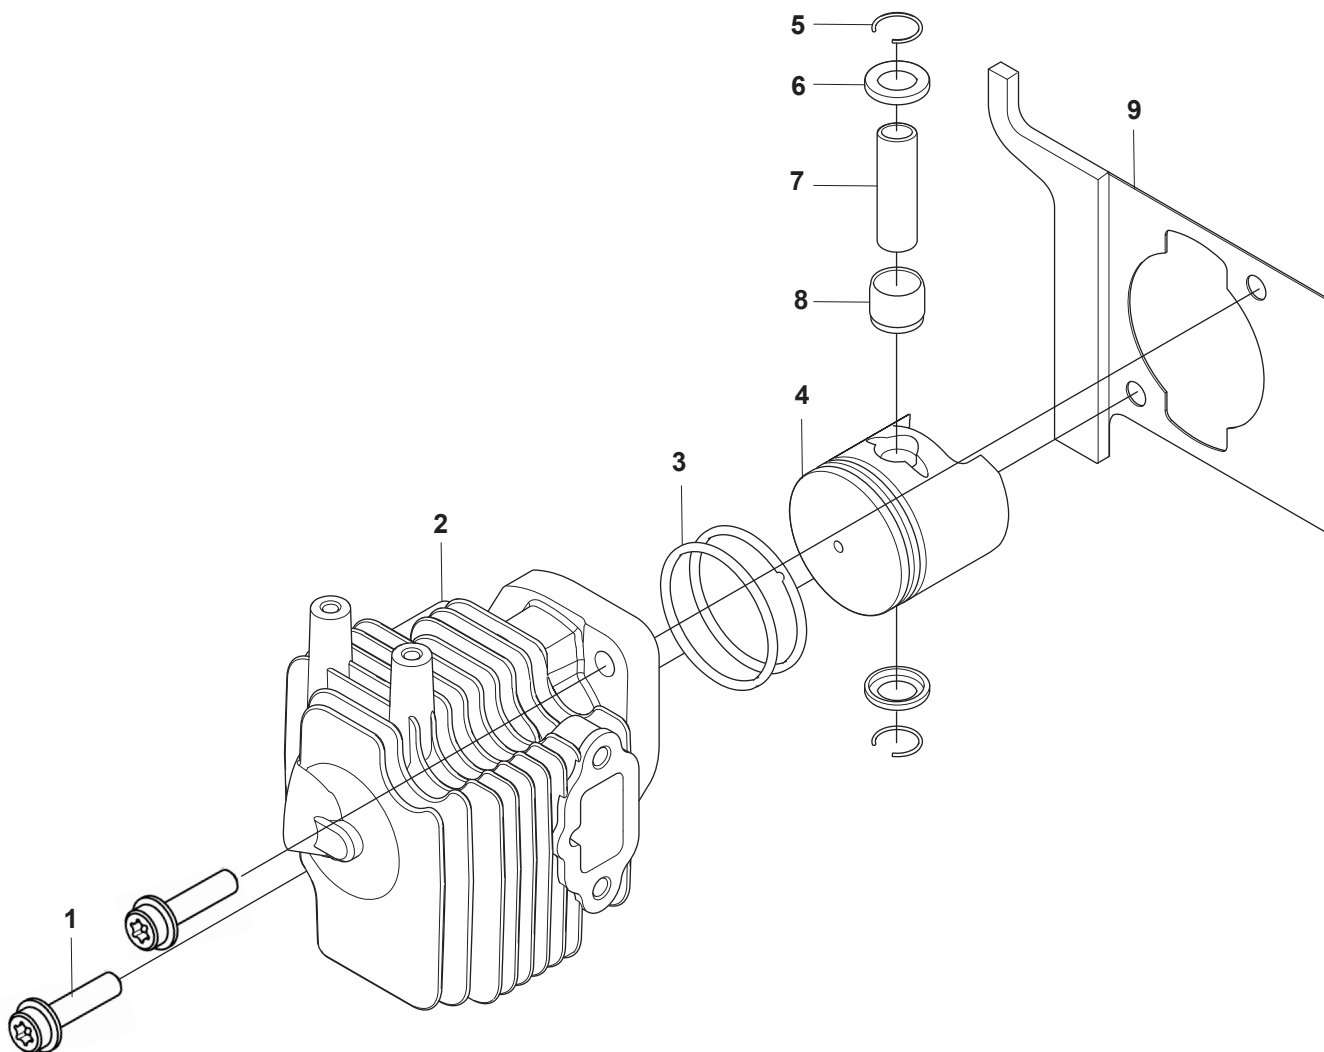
Fig. G CYLINDER & PISTON HT220-75, CHT220-60
